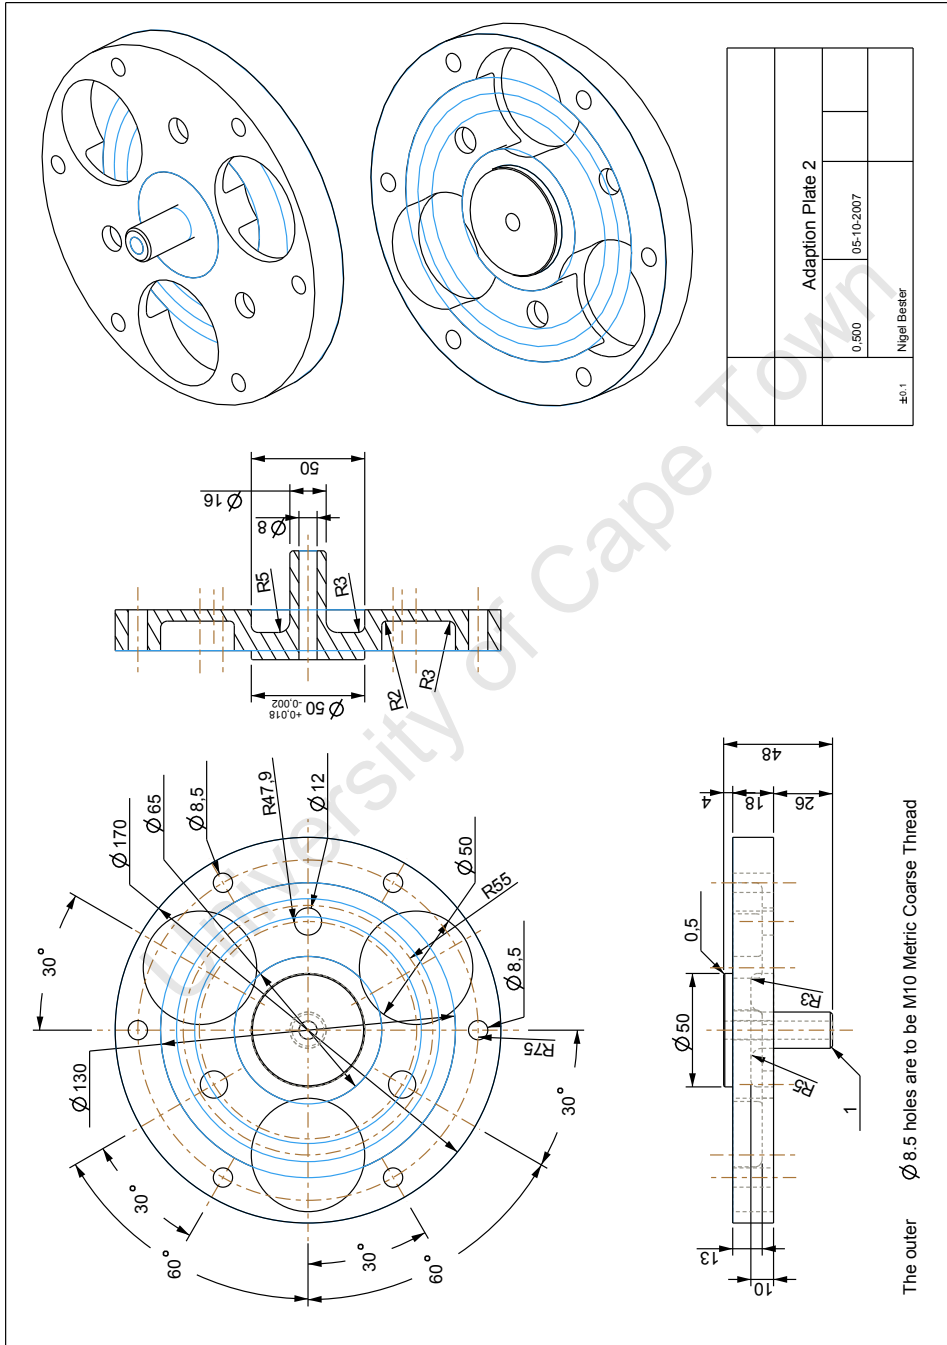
Shaft-coupling adapter plate manufacturing drawing.
